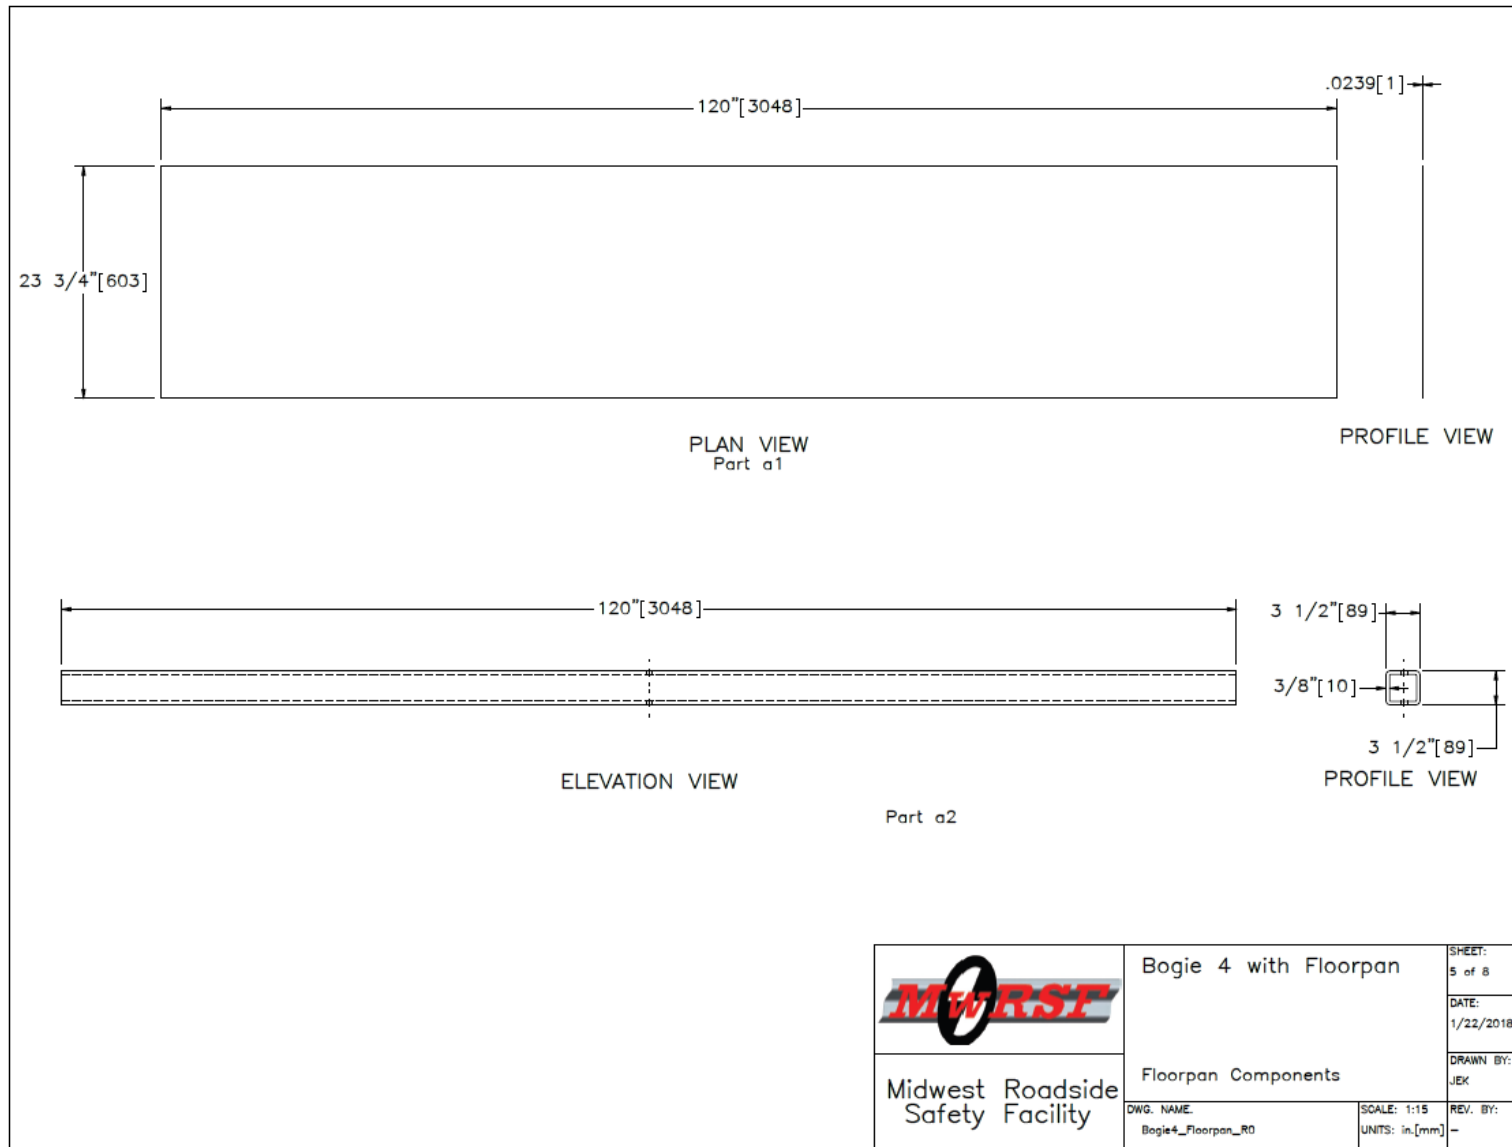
Floor Pan Components, Test Nos. MWFPF-22 through MWFPF-26
